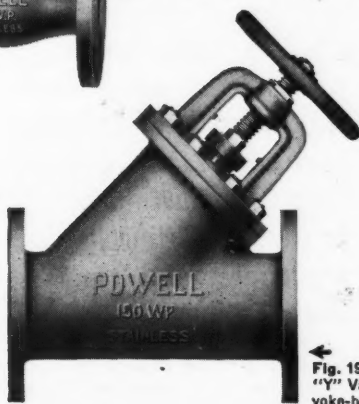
Large 150-pound Stainless Steel "Y" Valve with flanged ends, bolted flanged yoke-bonnet and outside screw stem.
